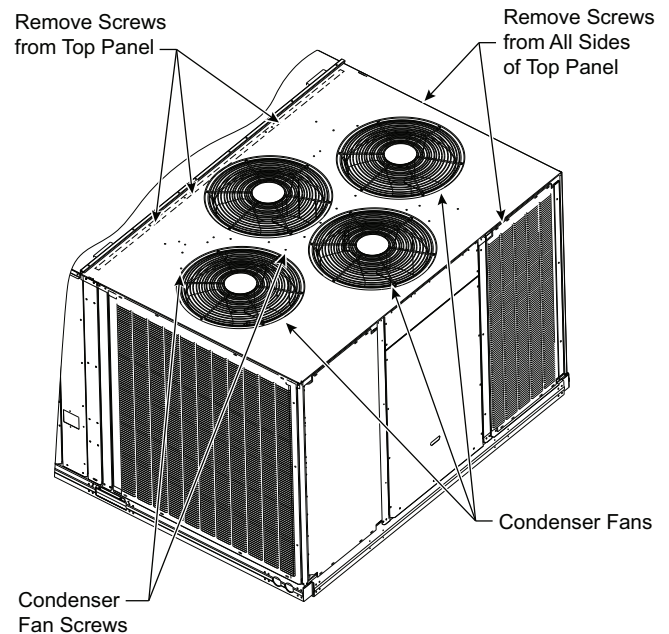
Location of Top Panel Screws and Coil Corner Post
